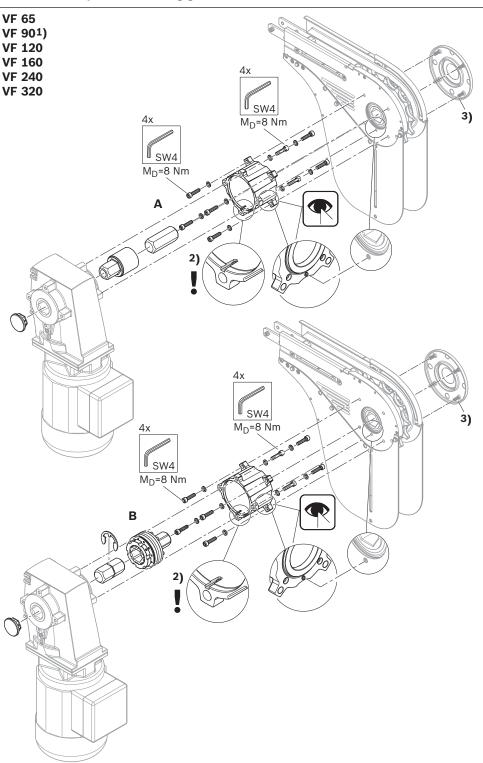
Basic unit, AL system, installing gear motor GM = 1
